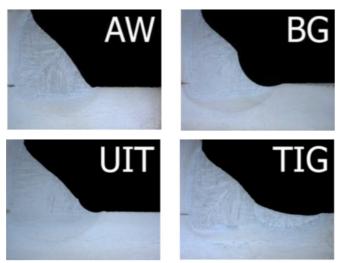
Image illustrating weld to geometries for "as welded" condition and after post treatment (burr grinding UIT and TIG dressing)¹¹
